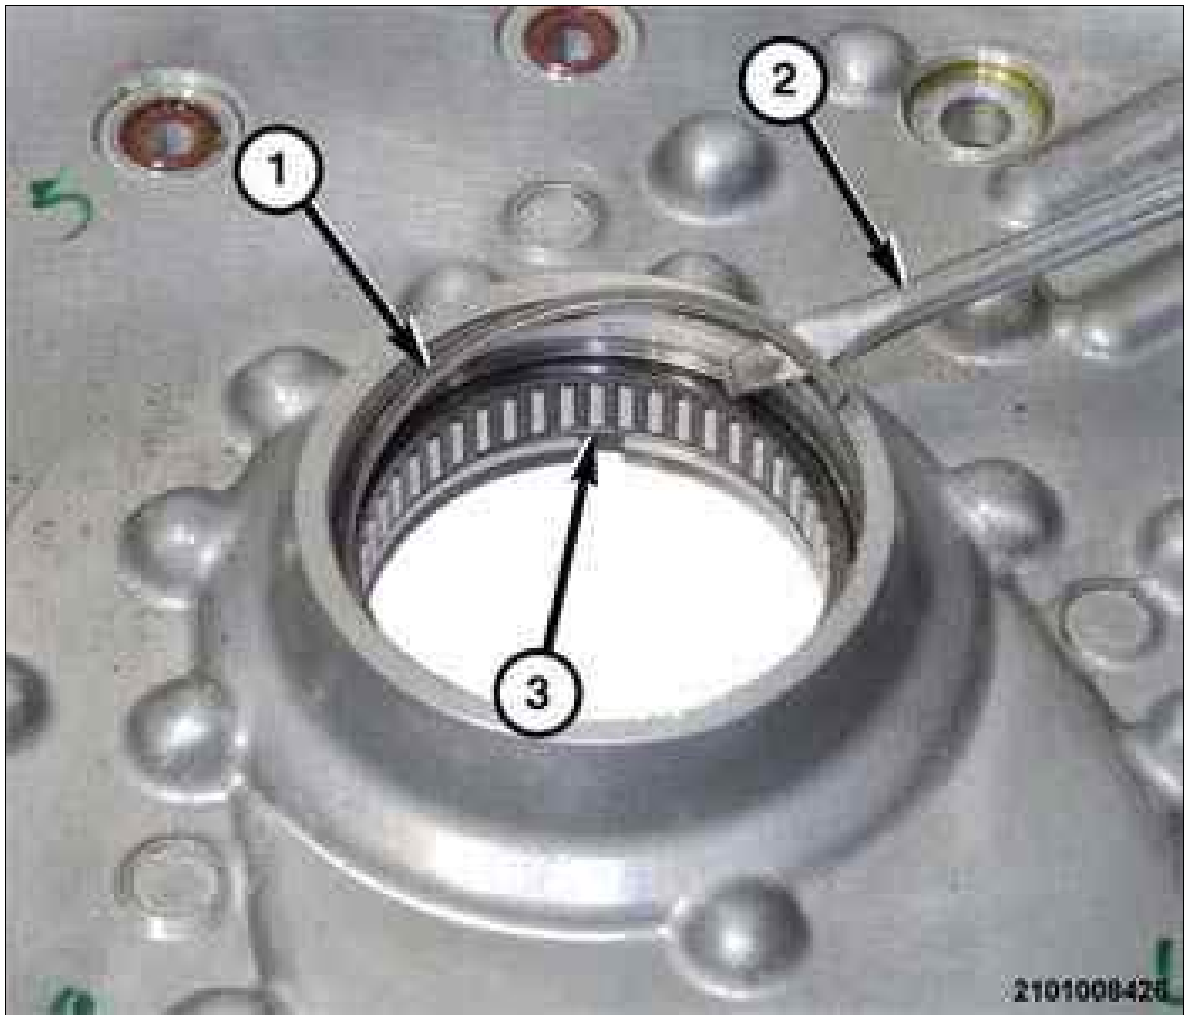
Seating Oil Pump Sprocket Needle Bearing Against Flange
